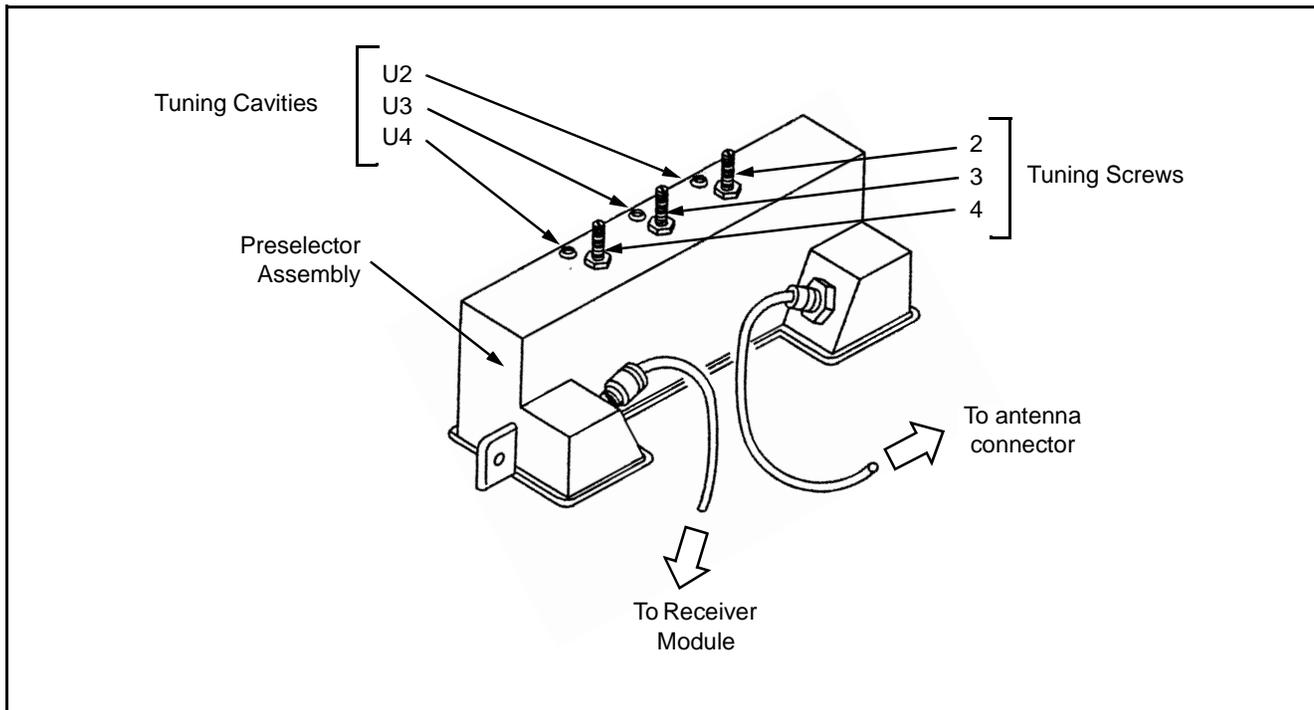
Location of Tuning Screws and Cavity Probe Holes
